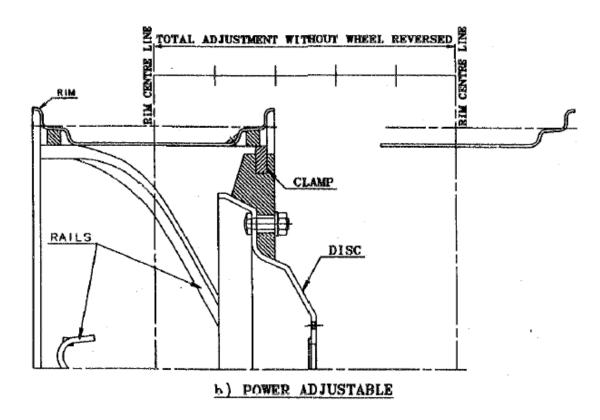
ADJUSTABLE WHEEL NOMENCLATURE
